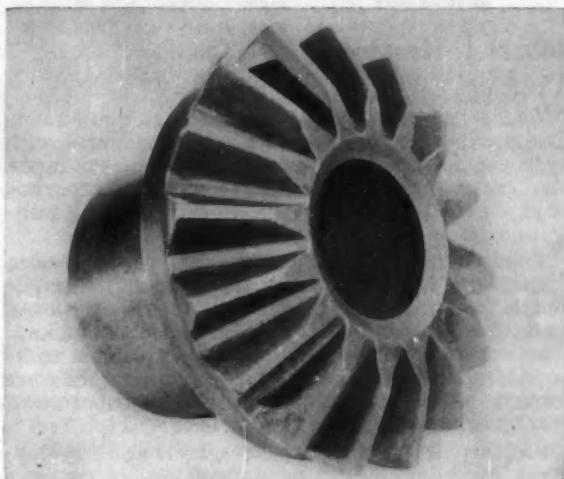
Differential side gear produced by the precision gear forging process. Tooth strength is greater than with machined gears.
